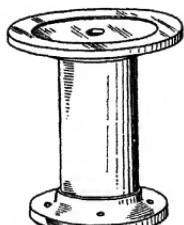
Depth gage used in cylinder bore to check height from faceplate.
